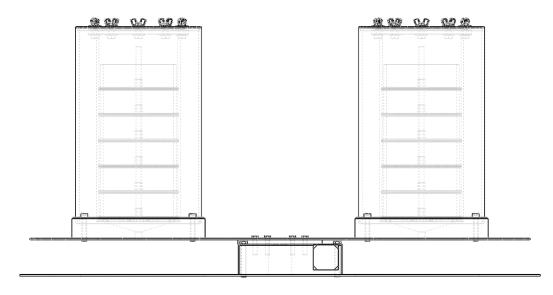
Assembly of rotating platform, deck and reactors – side view
